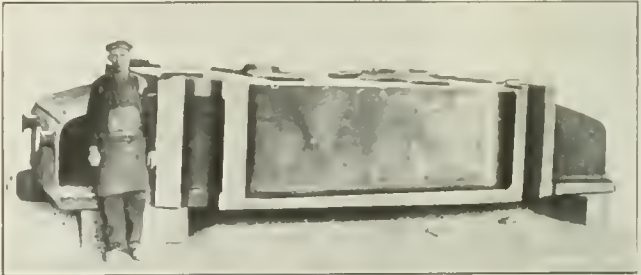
Another View of the Steel Casting shown in Fig. 10. This is One of the Largest Steel Castings made
